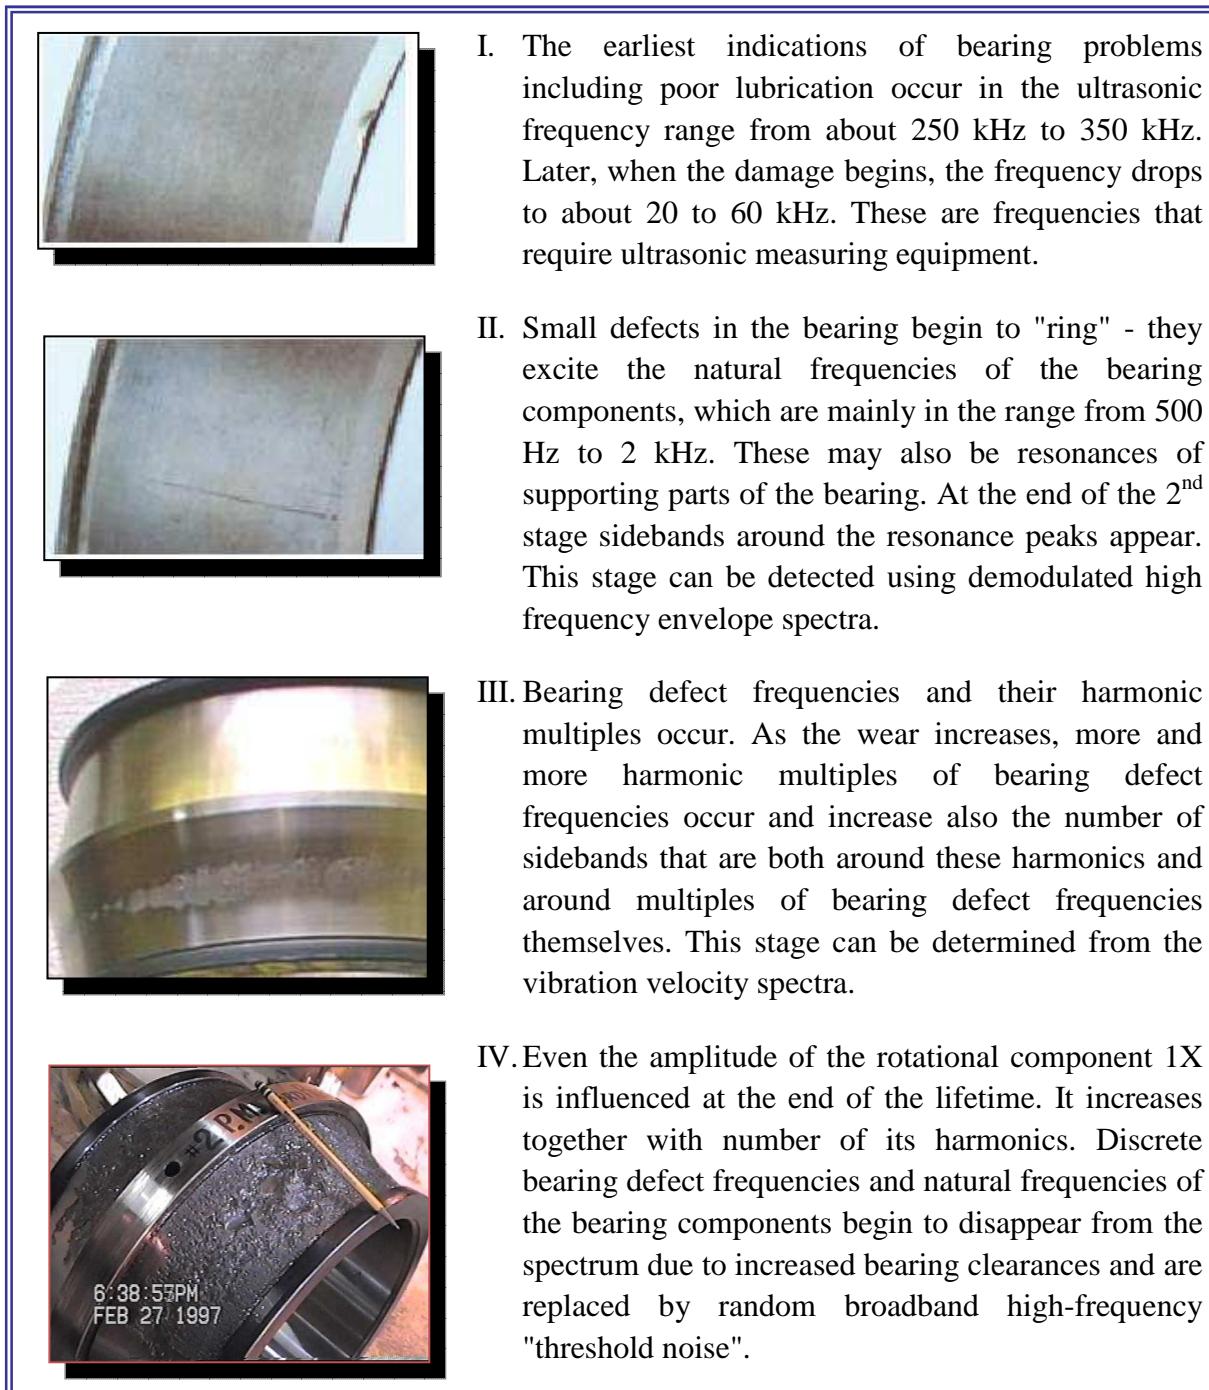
Stages of Rolling Bearing Defect Development
